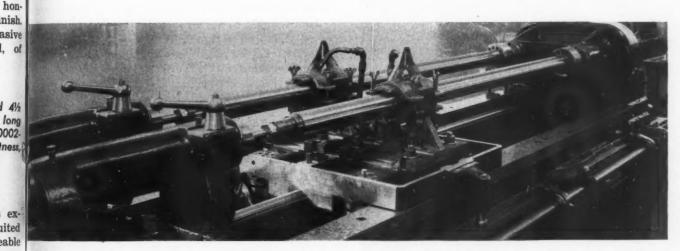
Above—Barnesdril No. 5-L external straight-line lapper finishing 3.350-inch recoil piston rods 57 inches long
